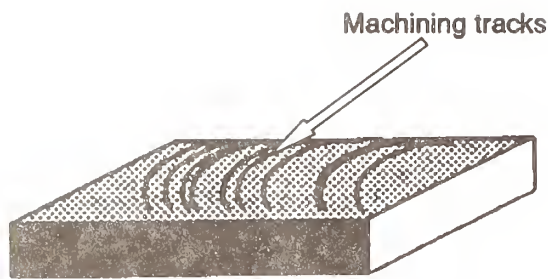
Principal drawing of machining tracks appearing at to high feeds and depths of cut.
